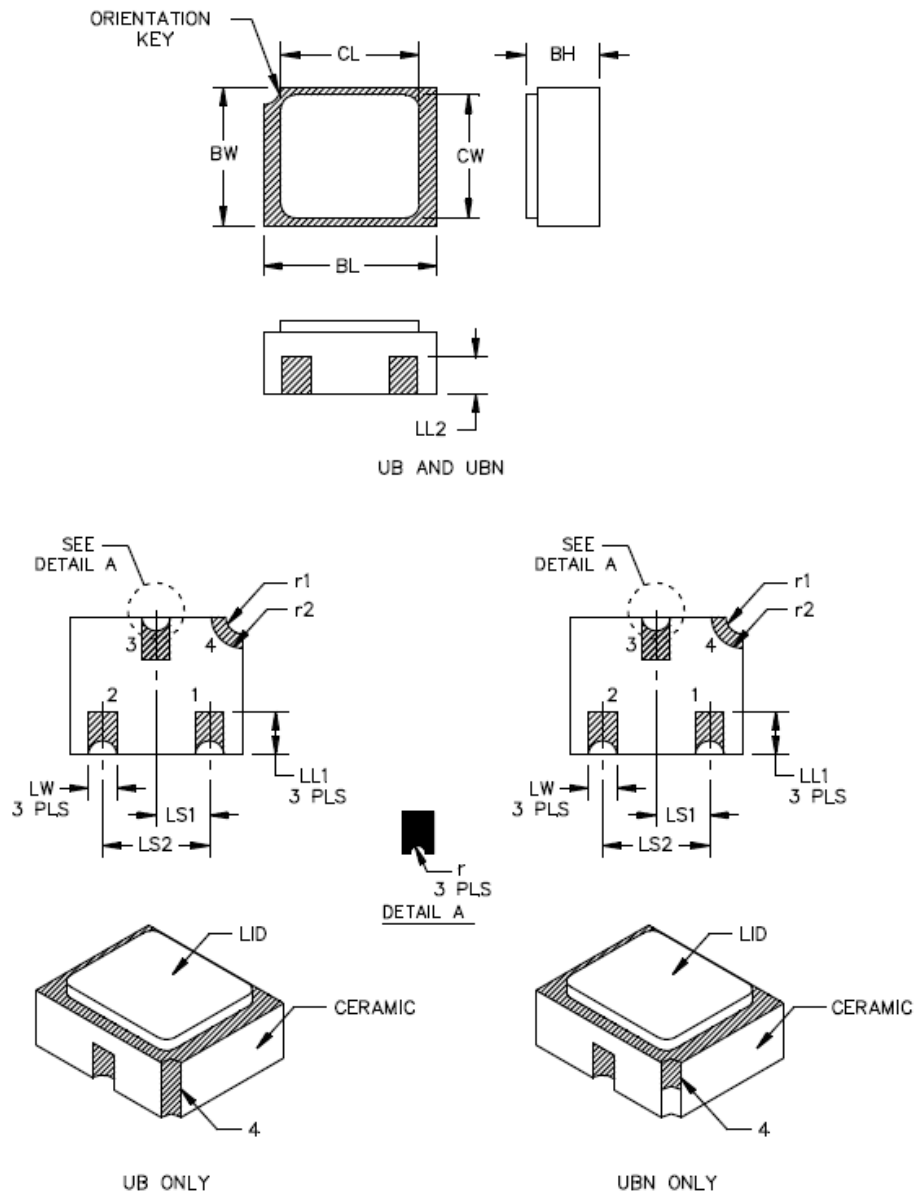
Physical dimensions, surface mount 2N3634UB through 2N3637UB (UB and UBN version).
